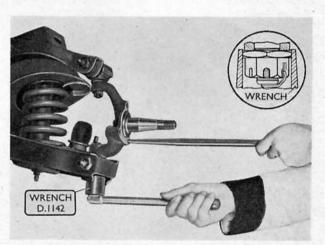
Tightening the king pin locknut back against the slotted nut. The inset shows the socket wrench engaged with the locknut
